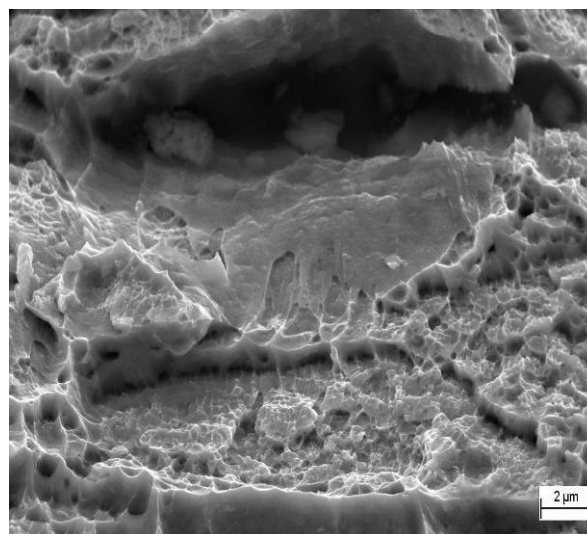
Terraces on the ductile fracture of investigated steel type X5CrNi18-8 after deformation with a draft of 33%, Mag.17000x
